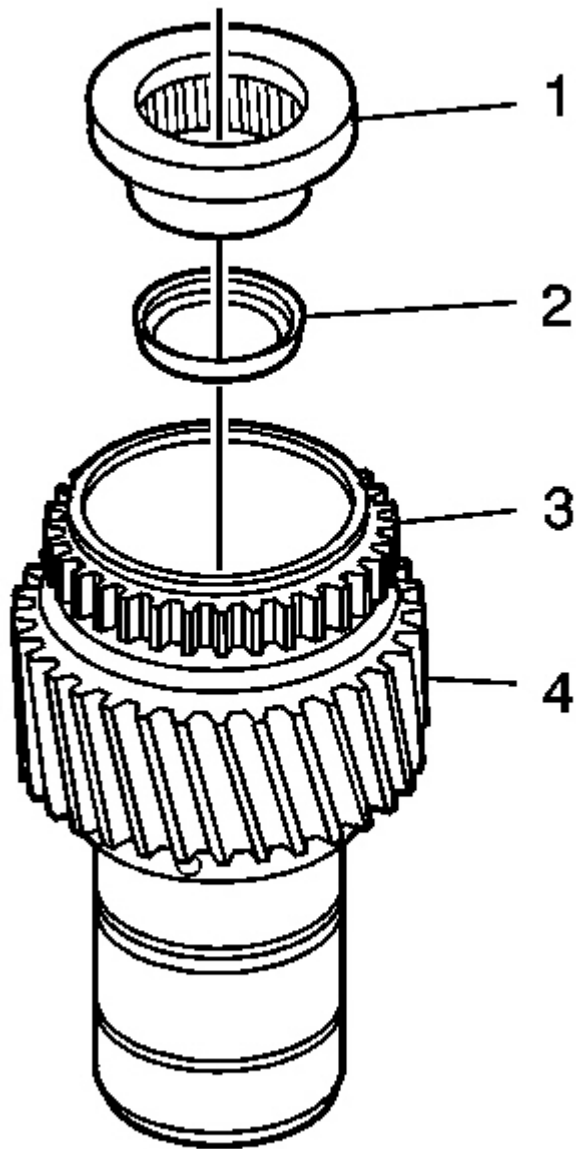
Front Output Shaft Inspection Points
